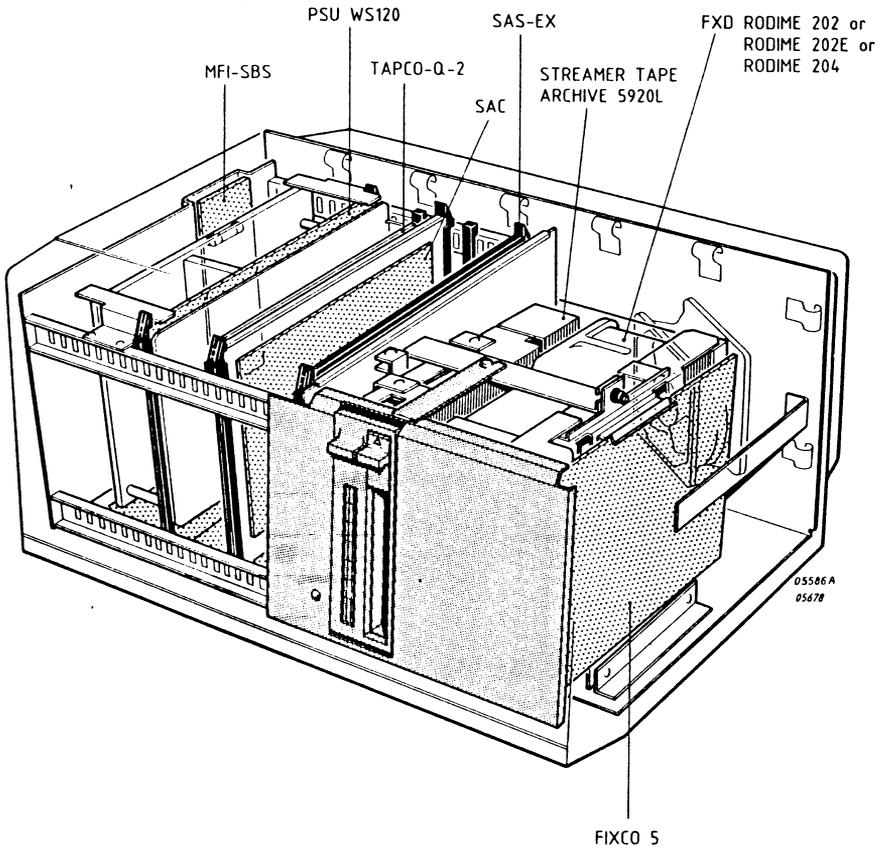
LOCATOR OF EXTENSION CABINET P3012-41
